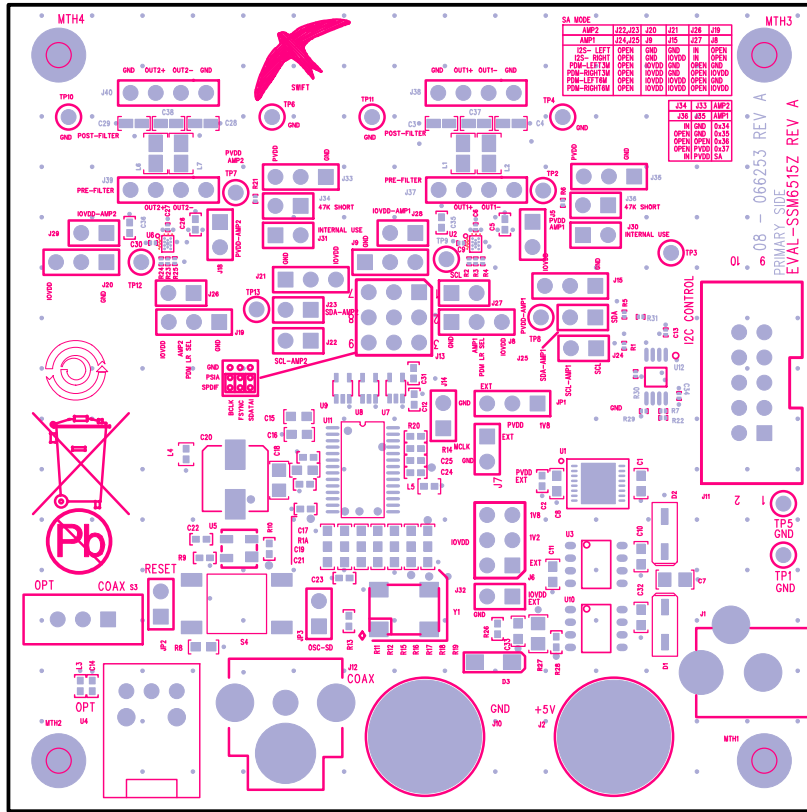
EVAL-SSM6515Z Layout: Top Assembly
